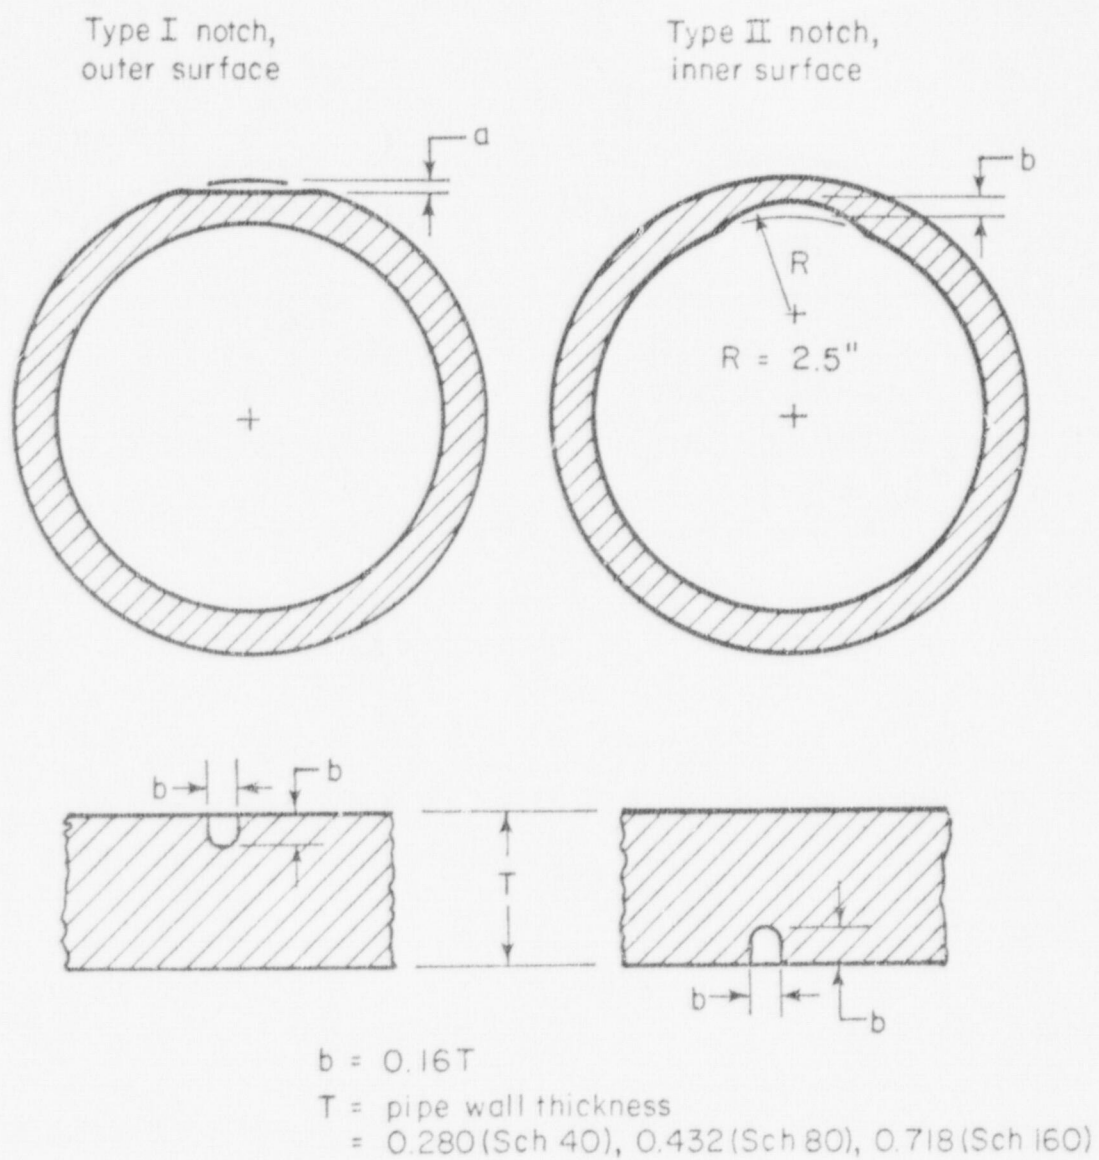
DETAILS OF NOTCH USED IN REFERENCE (7) NOTCHED PIPE TESTS
